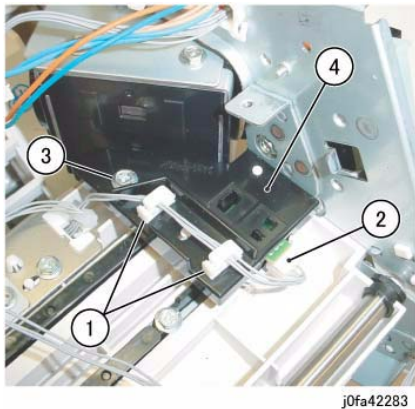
Removing the Rear Tamper Home Sensor Assembly (j0fa42283)
